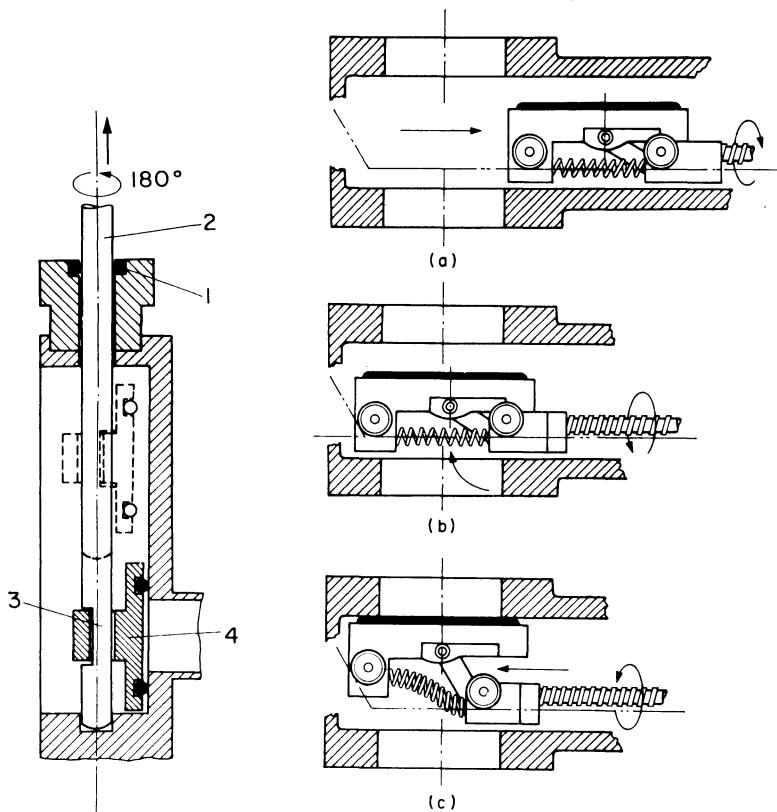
Gate valve, closed by an eccentric shaft. After Hartman⁵¹⁶ (*Courtesy of The American Institute of Physics*)
